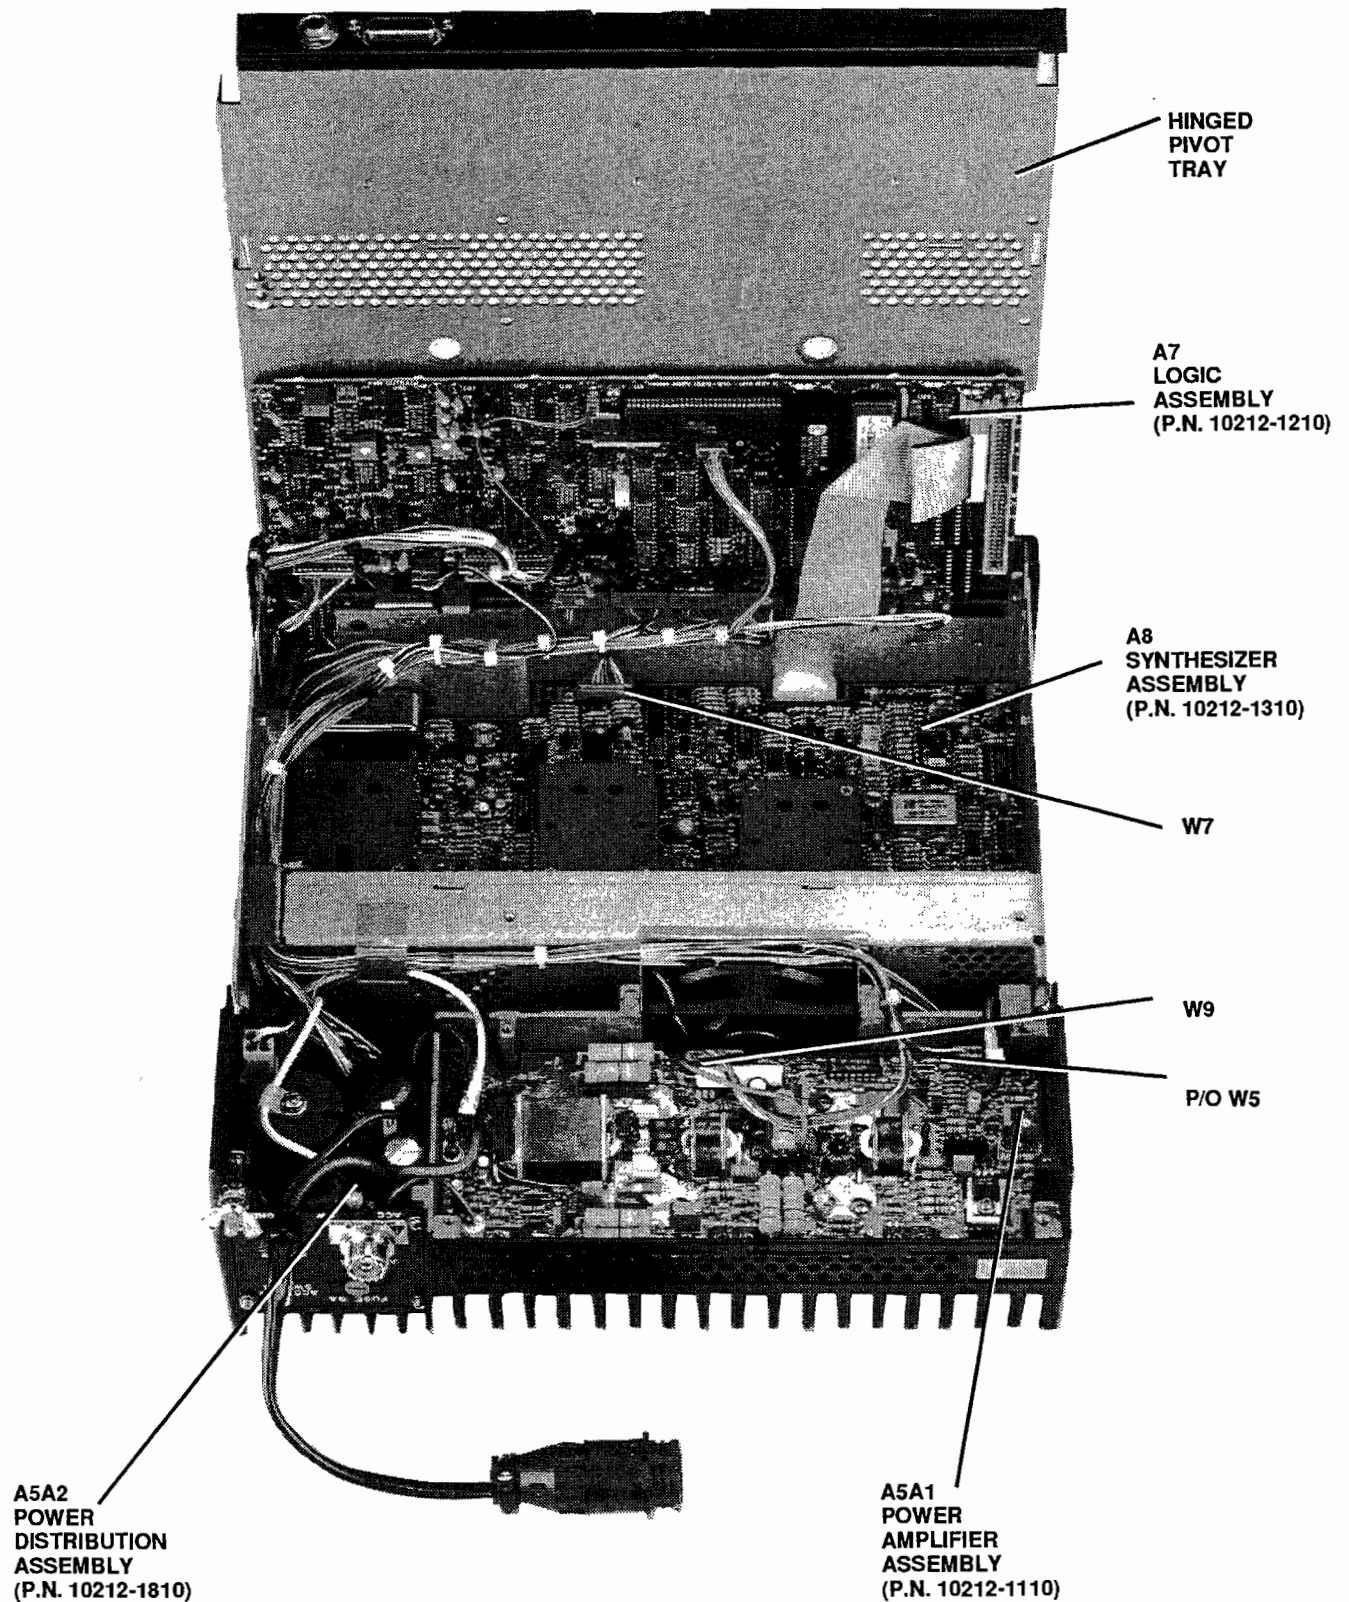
RF-3200 Bottom View (Cover Removed)
